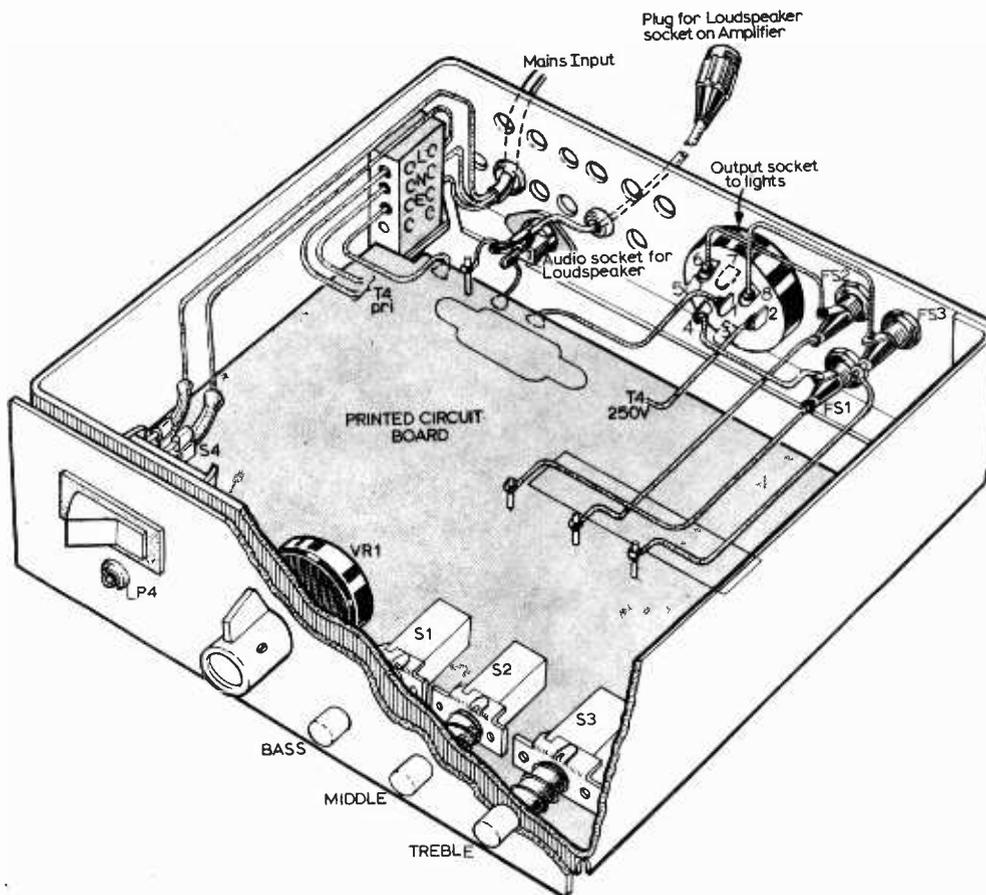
Wiring of chassis mounted components to the printed circuit board. Tag 1 on the lights output socket goes to chassis (and mains earth). The live lead (L) from the mains terminal block goes to the 250V tag on T4 transformer.
